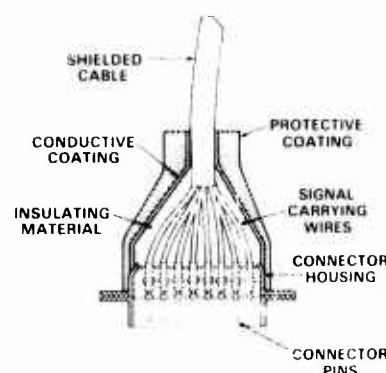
Cross-section drawing of the completed r.f. shielded cable.
